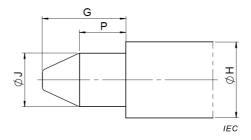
Details of pin-centre contact (for dimensions, see Table 2)
